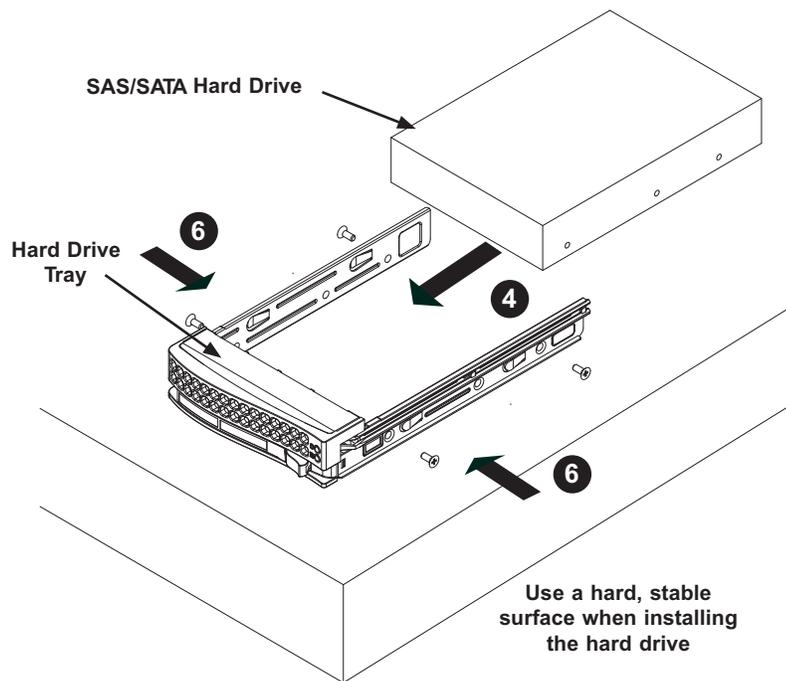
Installing SATA Drive to Hard Drive Tray
